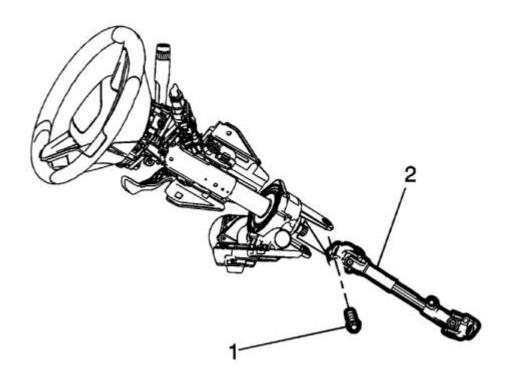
Lower Intermediate Steering Shaft & Bolt Courtesy of GENERAL MOTORS COMPANY
